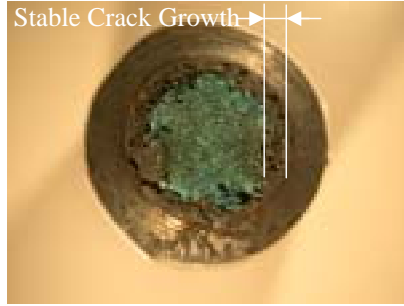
Fracture surface of a circular notched specimen for 12Cr ferritic heat resistant steel
